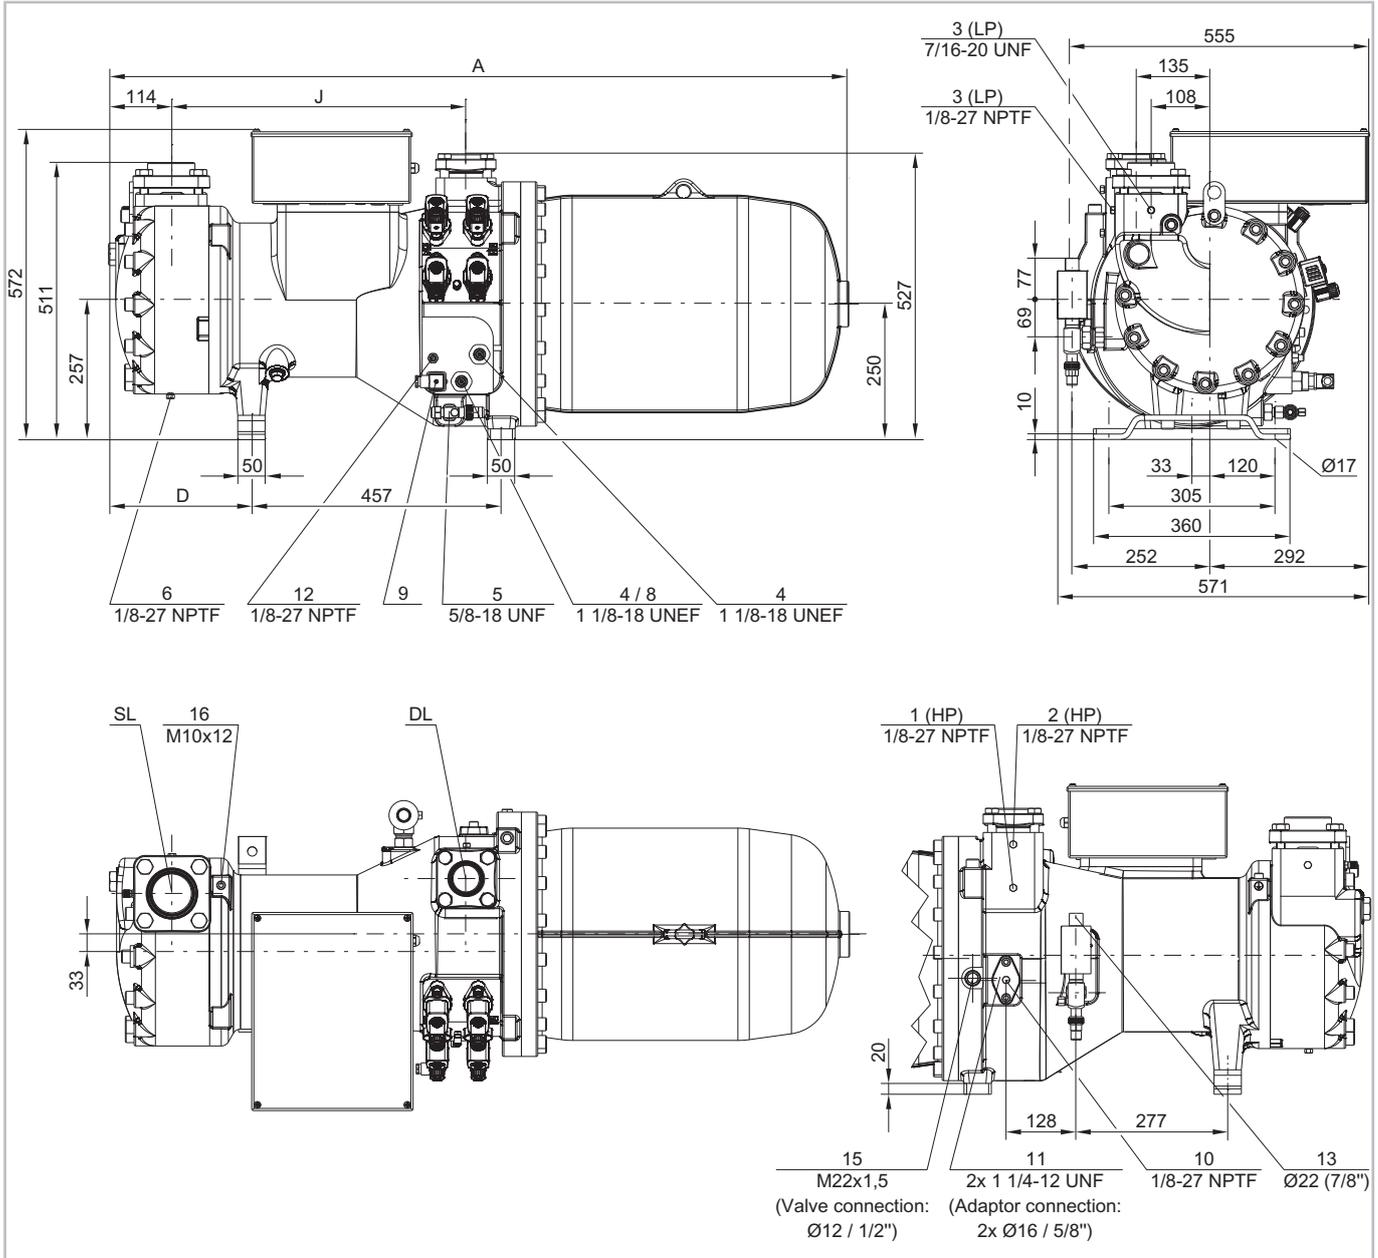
Dimensional drawing CSH7553-50Y .. CSH7593-110(Y), CSK7153-70 .. CSK7193-110
